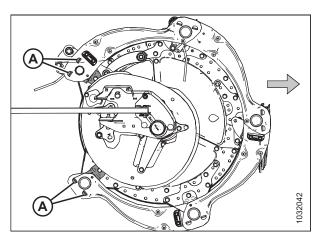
Reel Endshield Removed – Outboard Cam End
